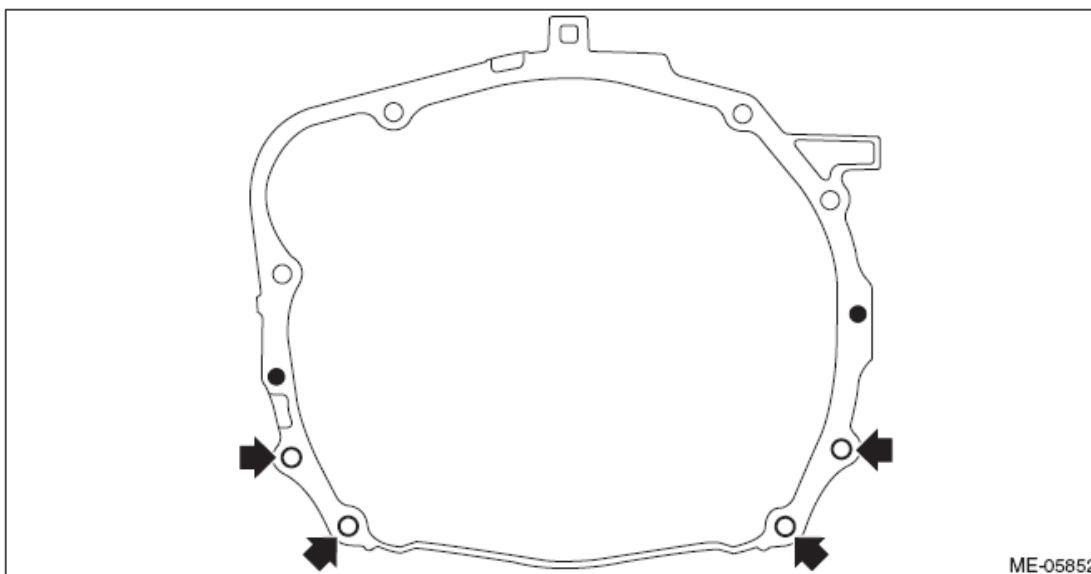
Locating Transmission Lower Side Nut And Bolt (CVT Model)
